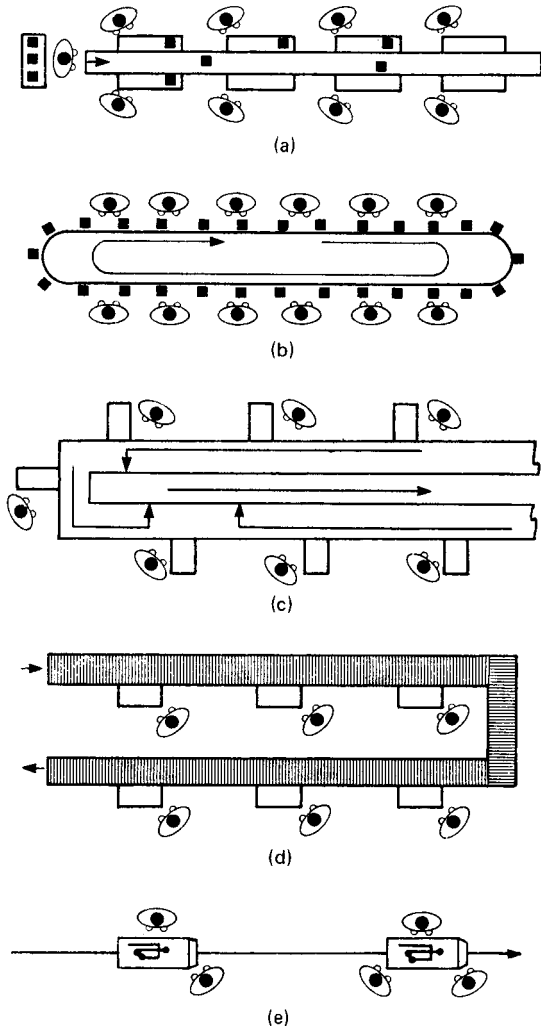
Conveyors used in assembly operations. (a) Belt conveyor, with diverters at each station; (b) carousel circulates assembly materials to workers; (c) multiple-path conveyors allow several products to be built at once; (d) gravity roller conveyors; (e) towline conveyor, moving assemblies from one group of assemblers to another. (*Modern Materials Handling*, Nov. 1979, page 116.)
